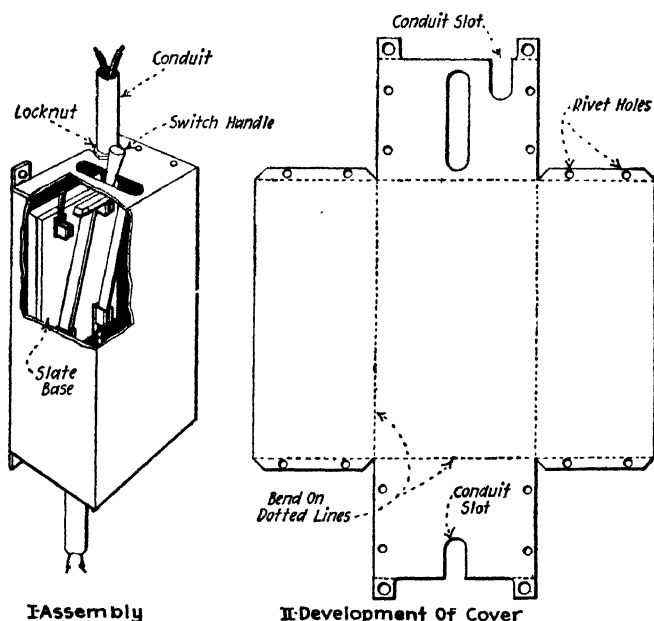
Improvised sheet iron switch and cutout case designed for attachment against a metallic or wooden surface with screws.
